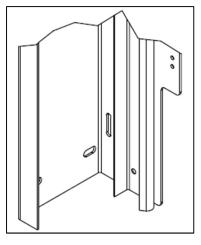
BOTTOM OF RIGHT-HAND LOWER WALL ANGLE ASSEMBLY
